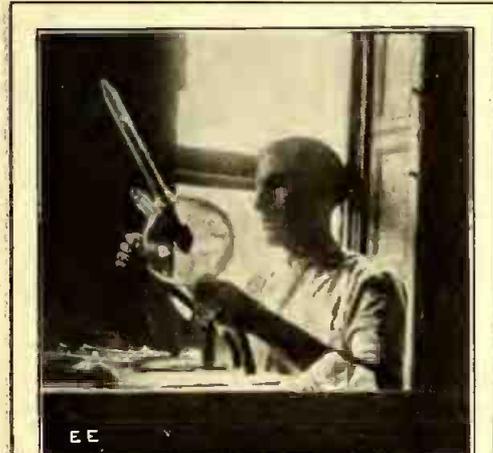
Showing the Different Parts of X-Ray Tube Assembled.
